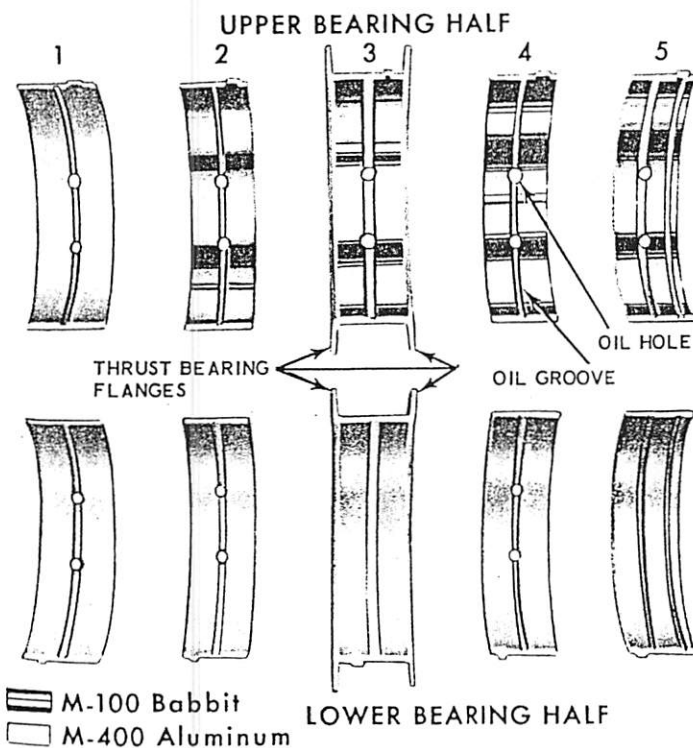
Set of main bearings, some with an aluminum coating, others employ babbitt. Note thrust flanges on thrust bearing. (Cadillac)
